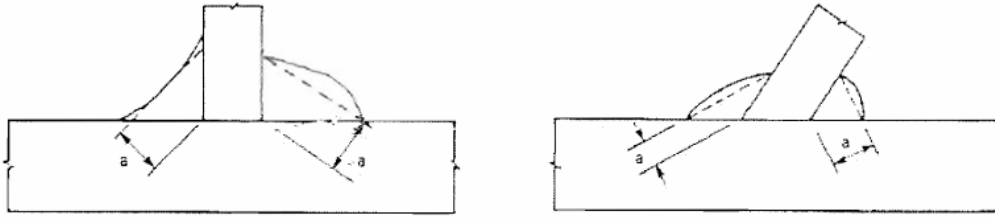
Fillet weld throat thickness. [14, Sec. 4.5.2]
